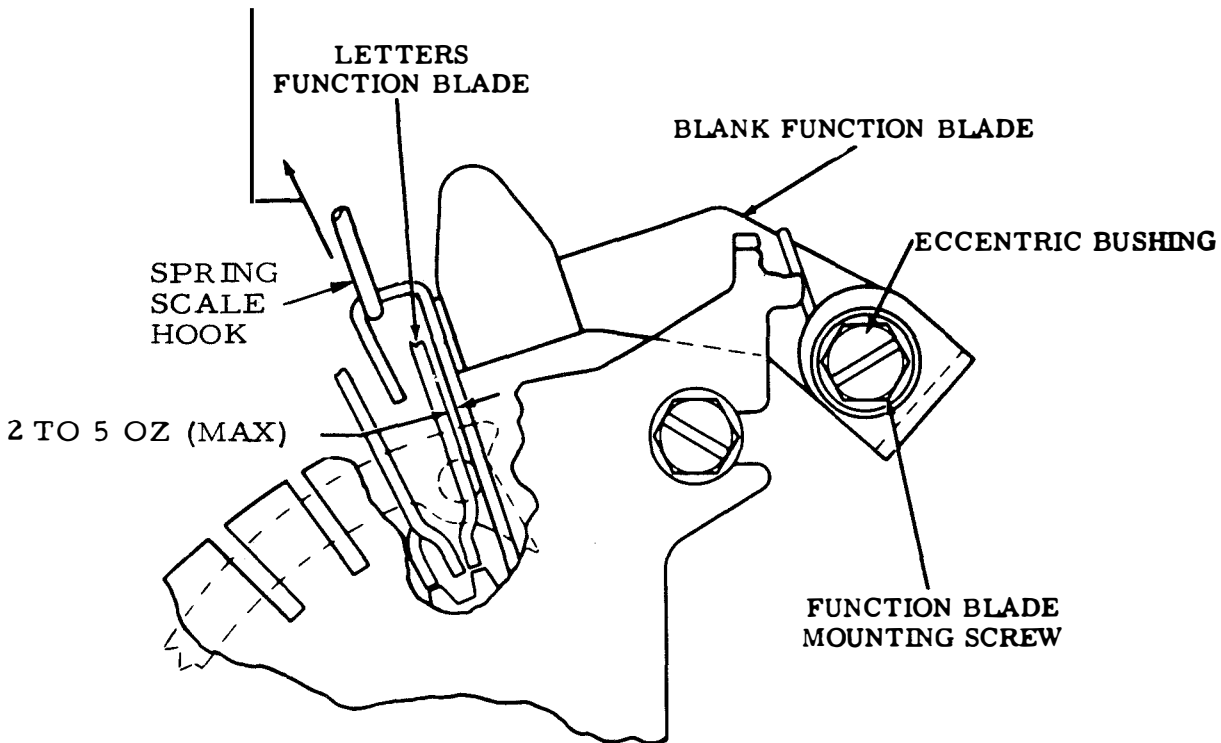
Blank Function Blade and Function Blade Torsion Spring - Rear View
